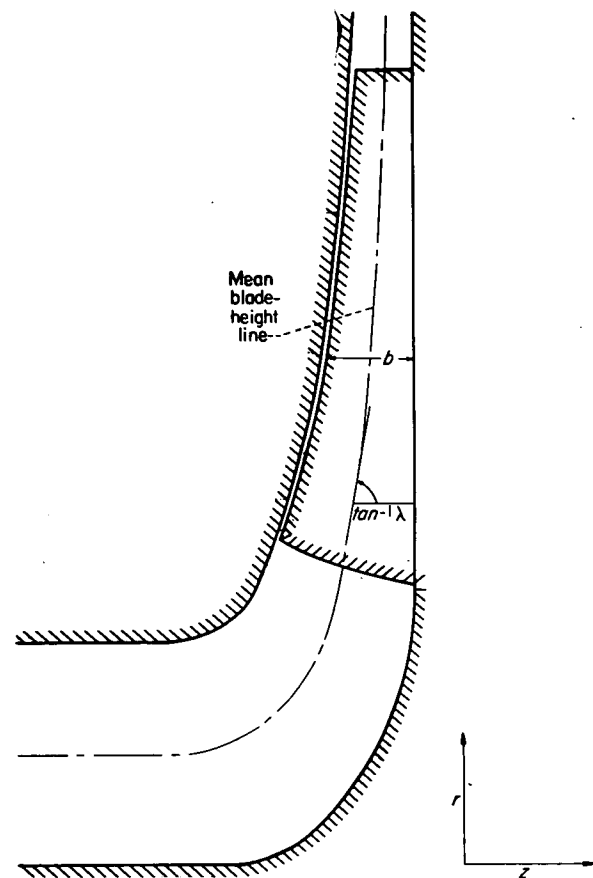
Axial-radial plane view of 48-inch-diameter centrifugal impeller.
